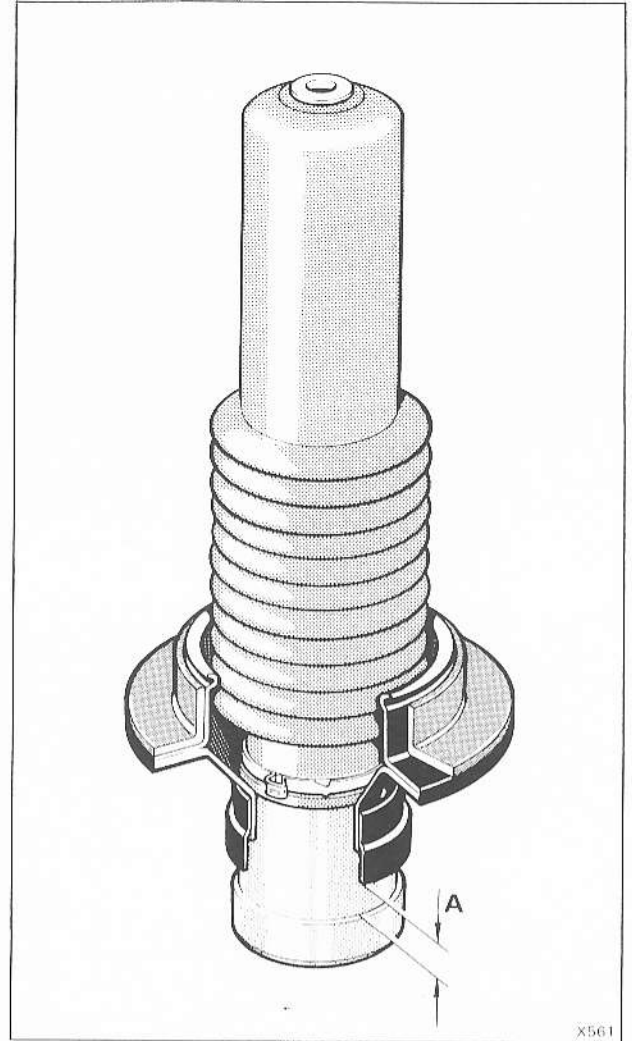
Spring support plate, collar, and sleeve assembly
